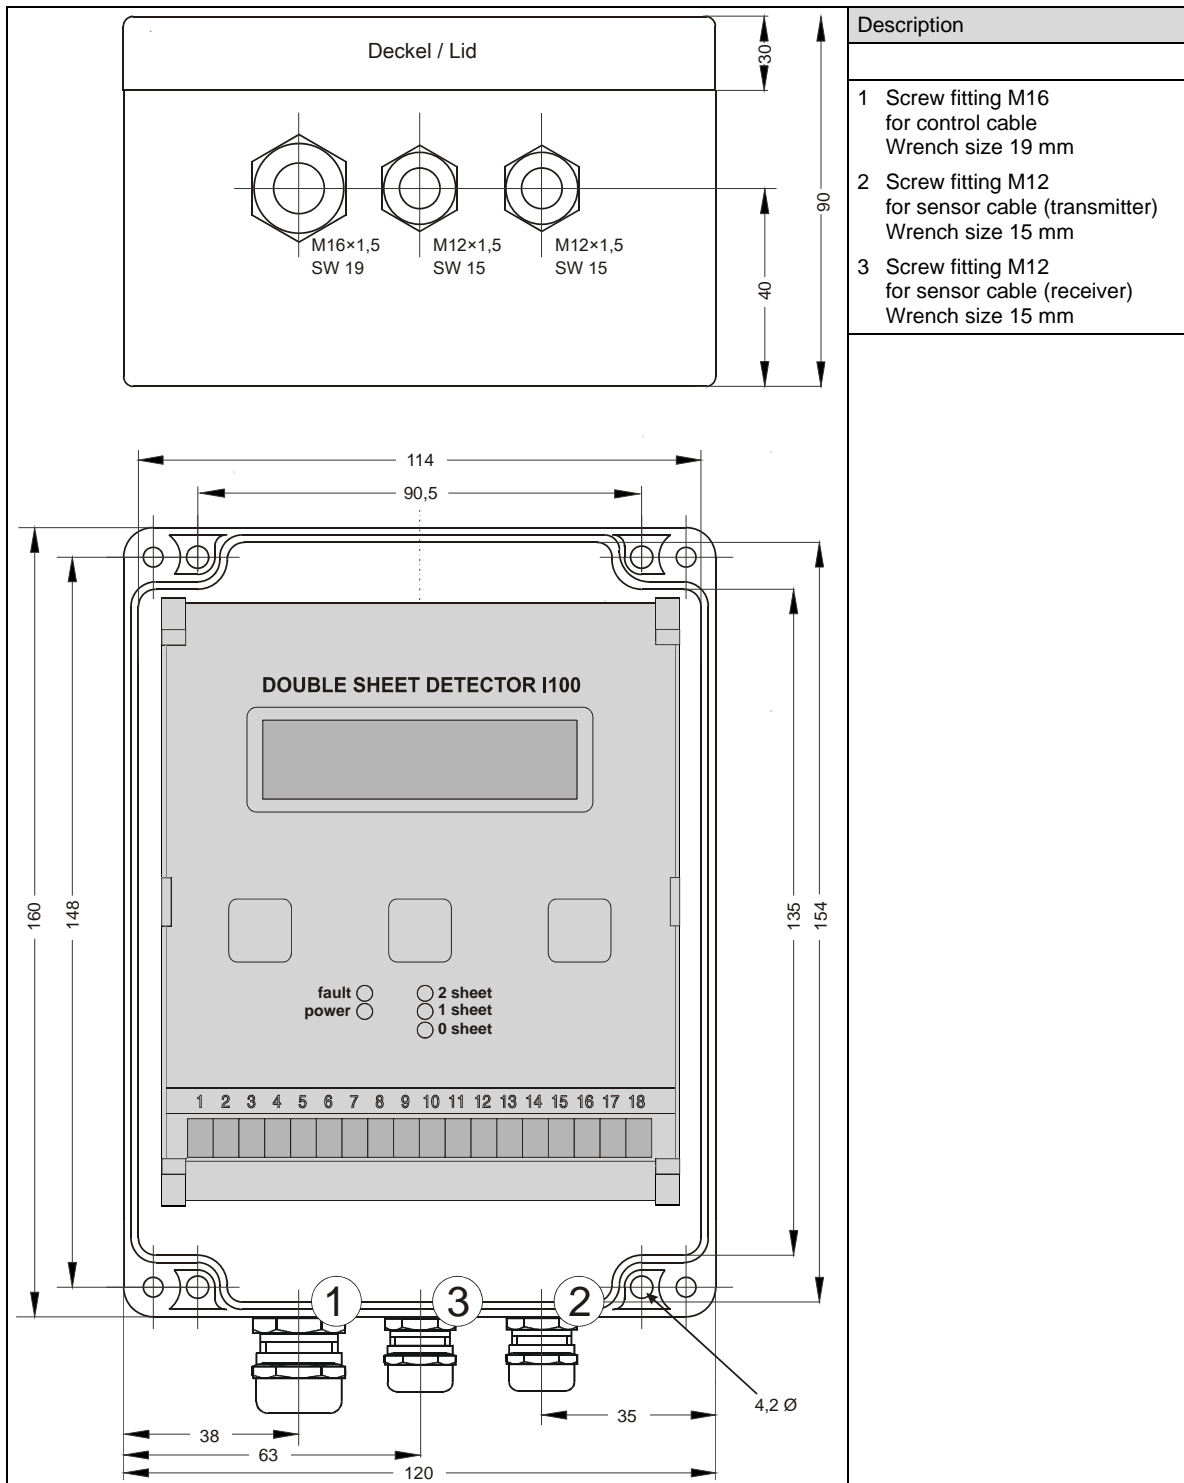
Dimensions of I100-IP65 (in protective enclosure IP65)
